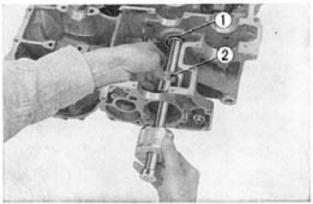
(1) Countershaft bearing (2) Bearing puller
